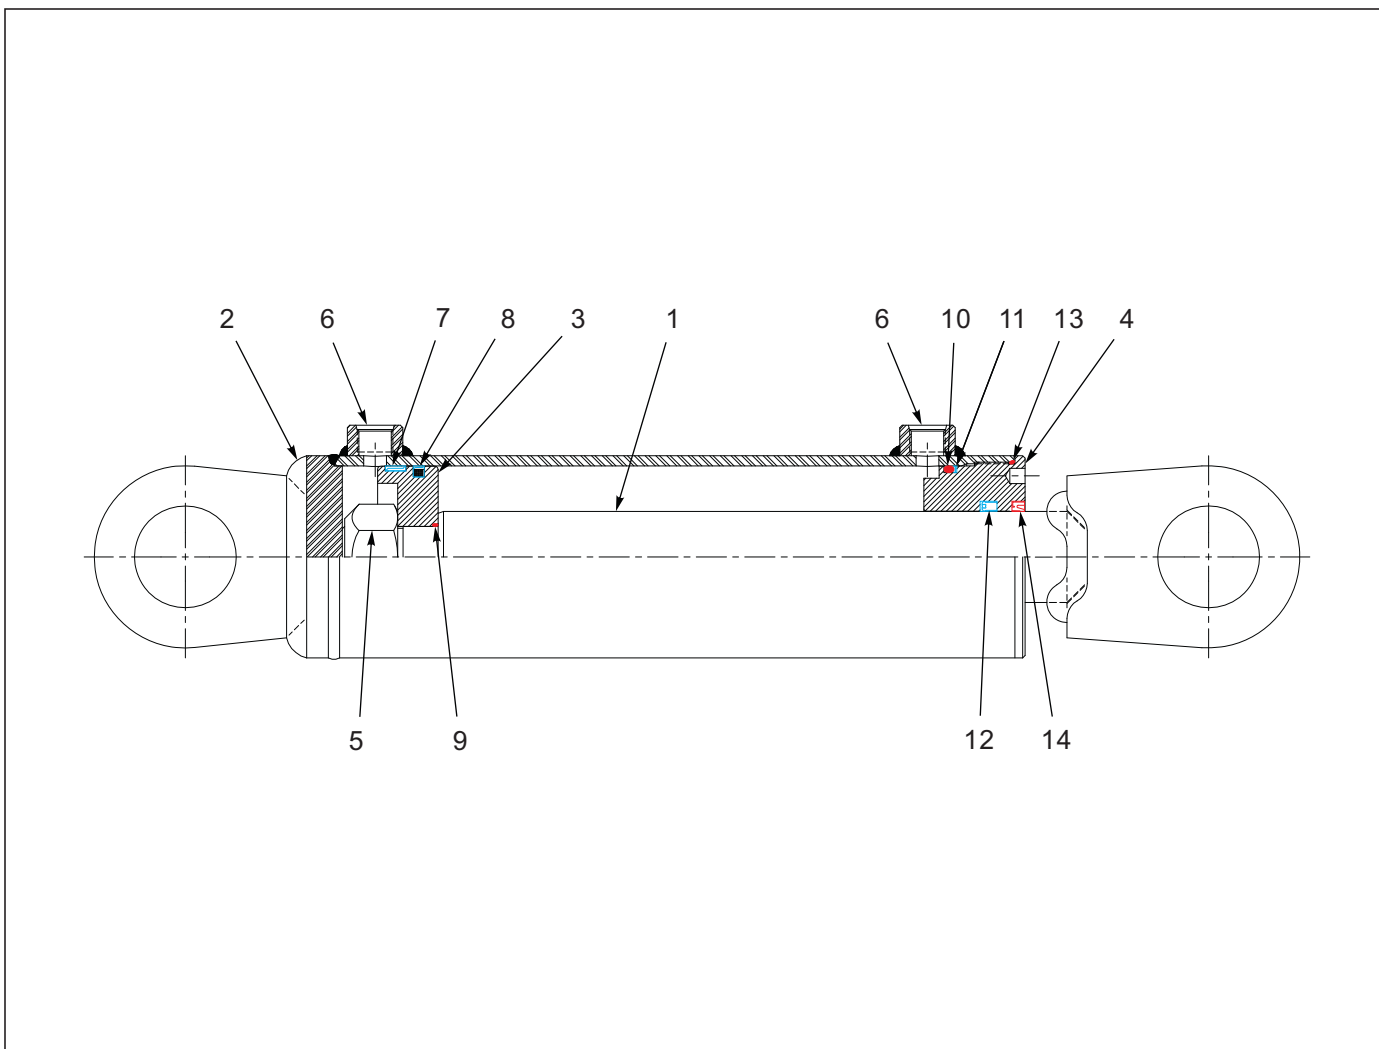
Cylinder Assembly 4-1/2 x 8
